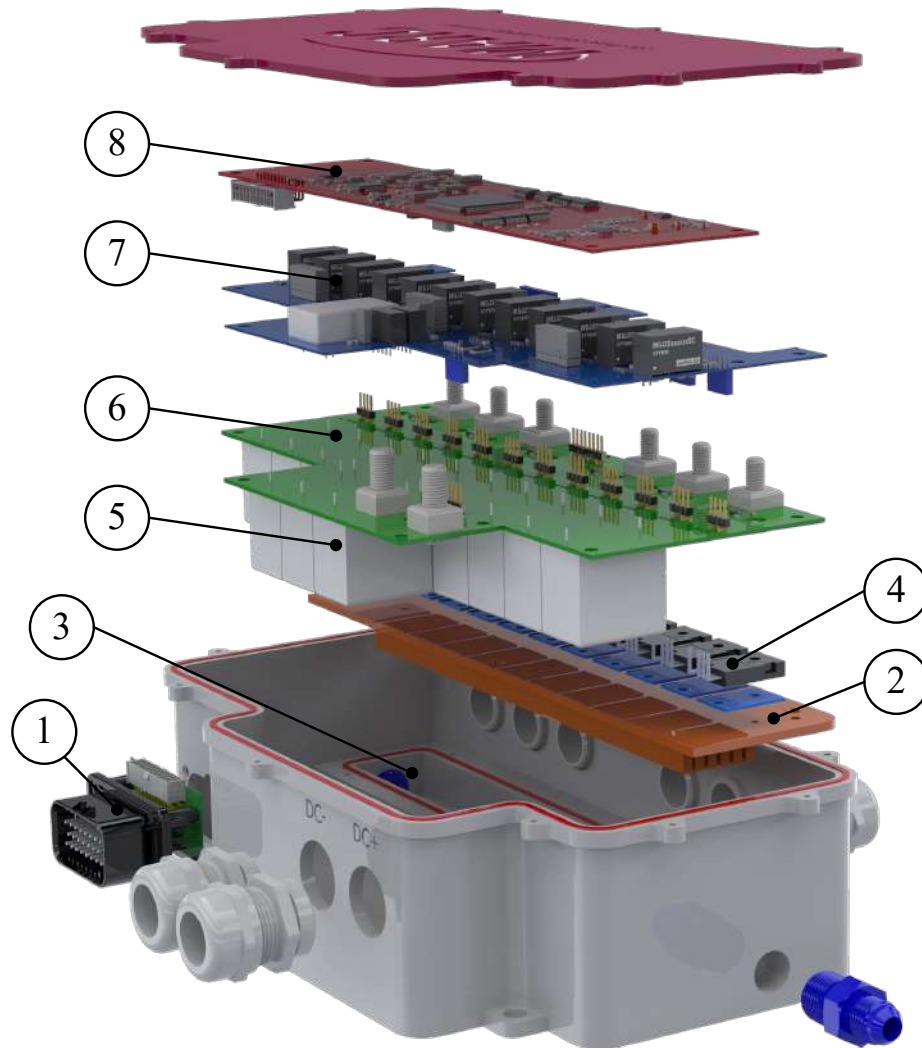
Exploded view of the inverter model. (1) Low-voltage connector with interface board. (2) heat sink. (3) Coolant channel. (4) Discrete MOSFETs. (5) DC-capacitor bank. (6) Power board. (7) Gate driver board. (8) Control board.
